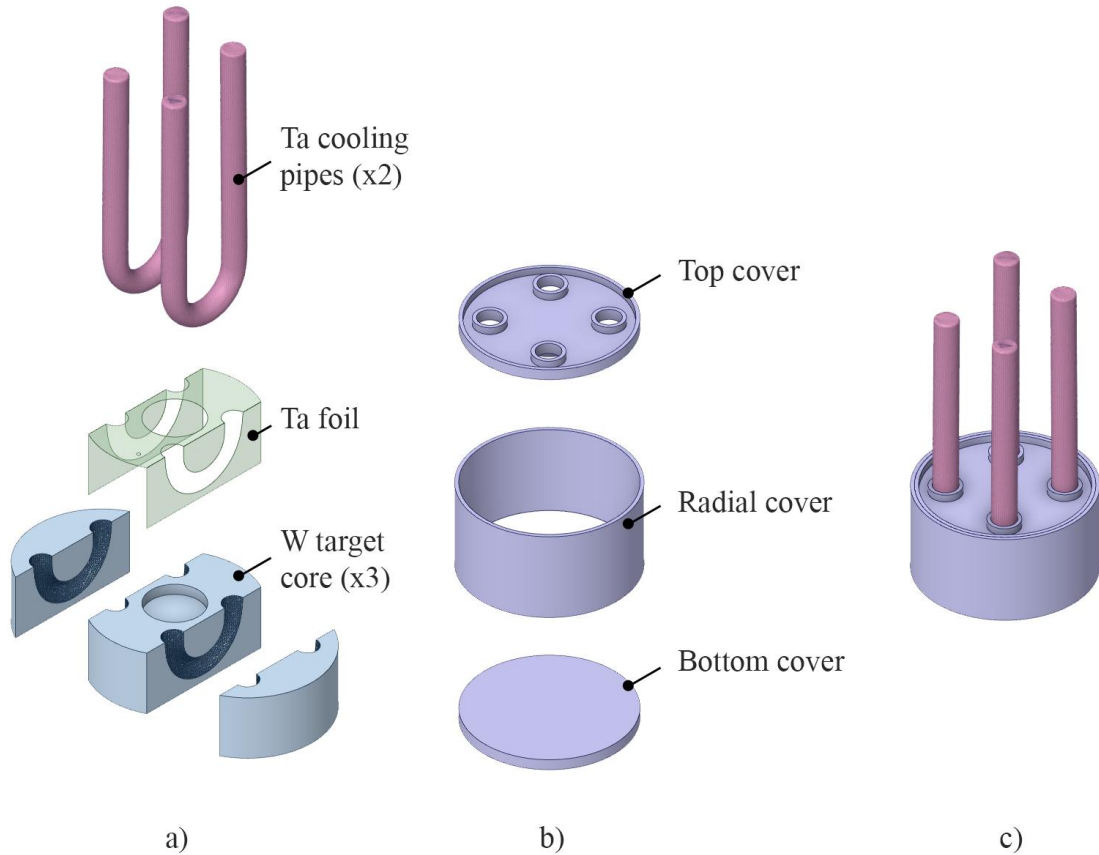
target with embedded cooling pipes prototype: a) exploded view of the target components only, b) exploded view of the HIP capsule components only and c) HIP capsule final assembly.
